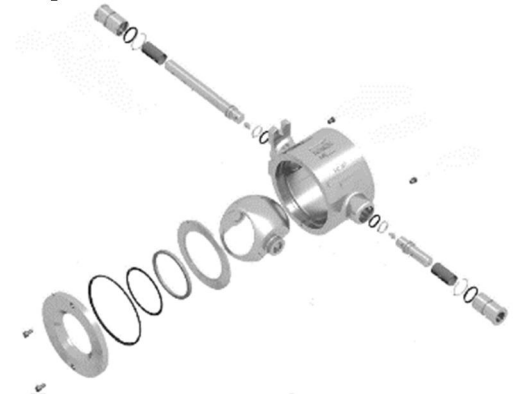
EXPLODED VIEW OF THE VALVE INTERNALS [4]
